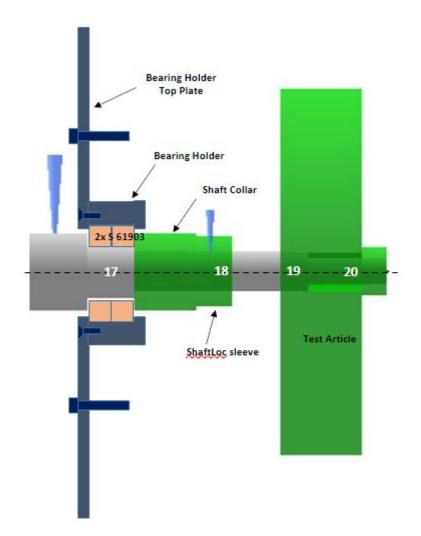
NDE Backup Bearings: Double Row Angular Contact Ball Bearings, Face-to-Face Arrangement, (2 x S 61903 C TA)
